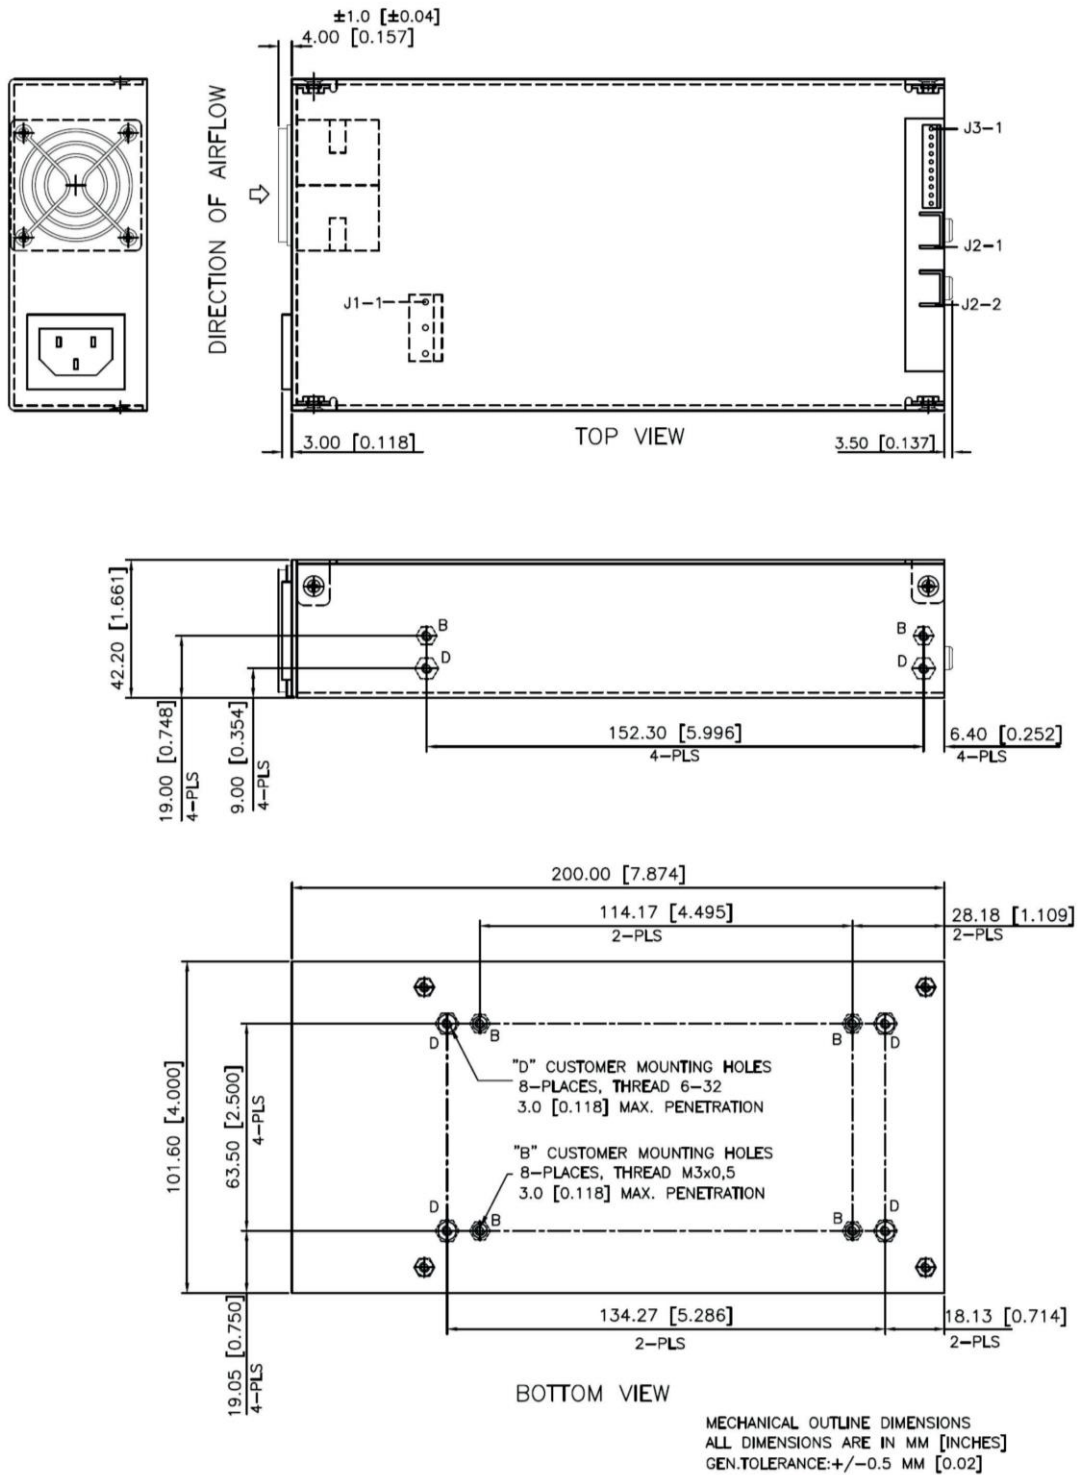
Mechanical Drawing (With Side Fan Mounting)
